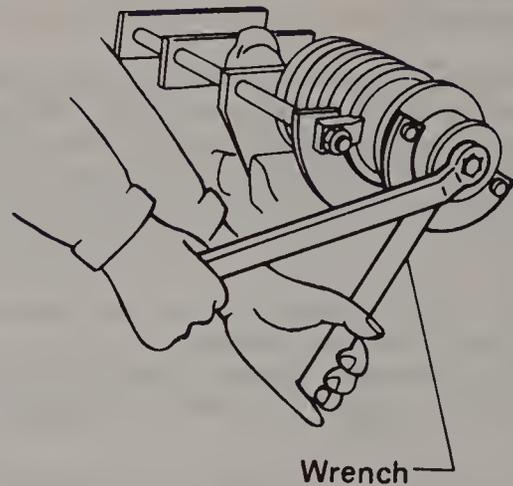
Mount the shock assembly in a vise and hold it in a horizontal position (Sec 3)
